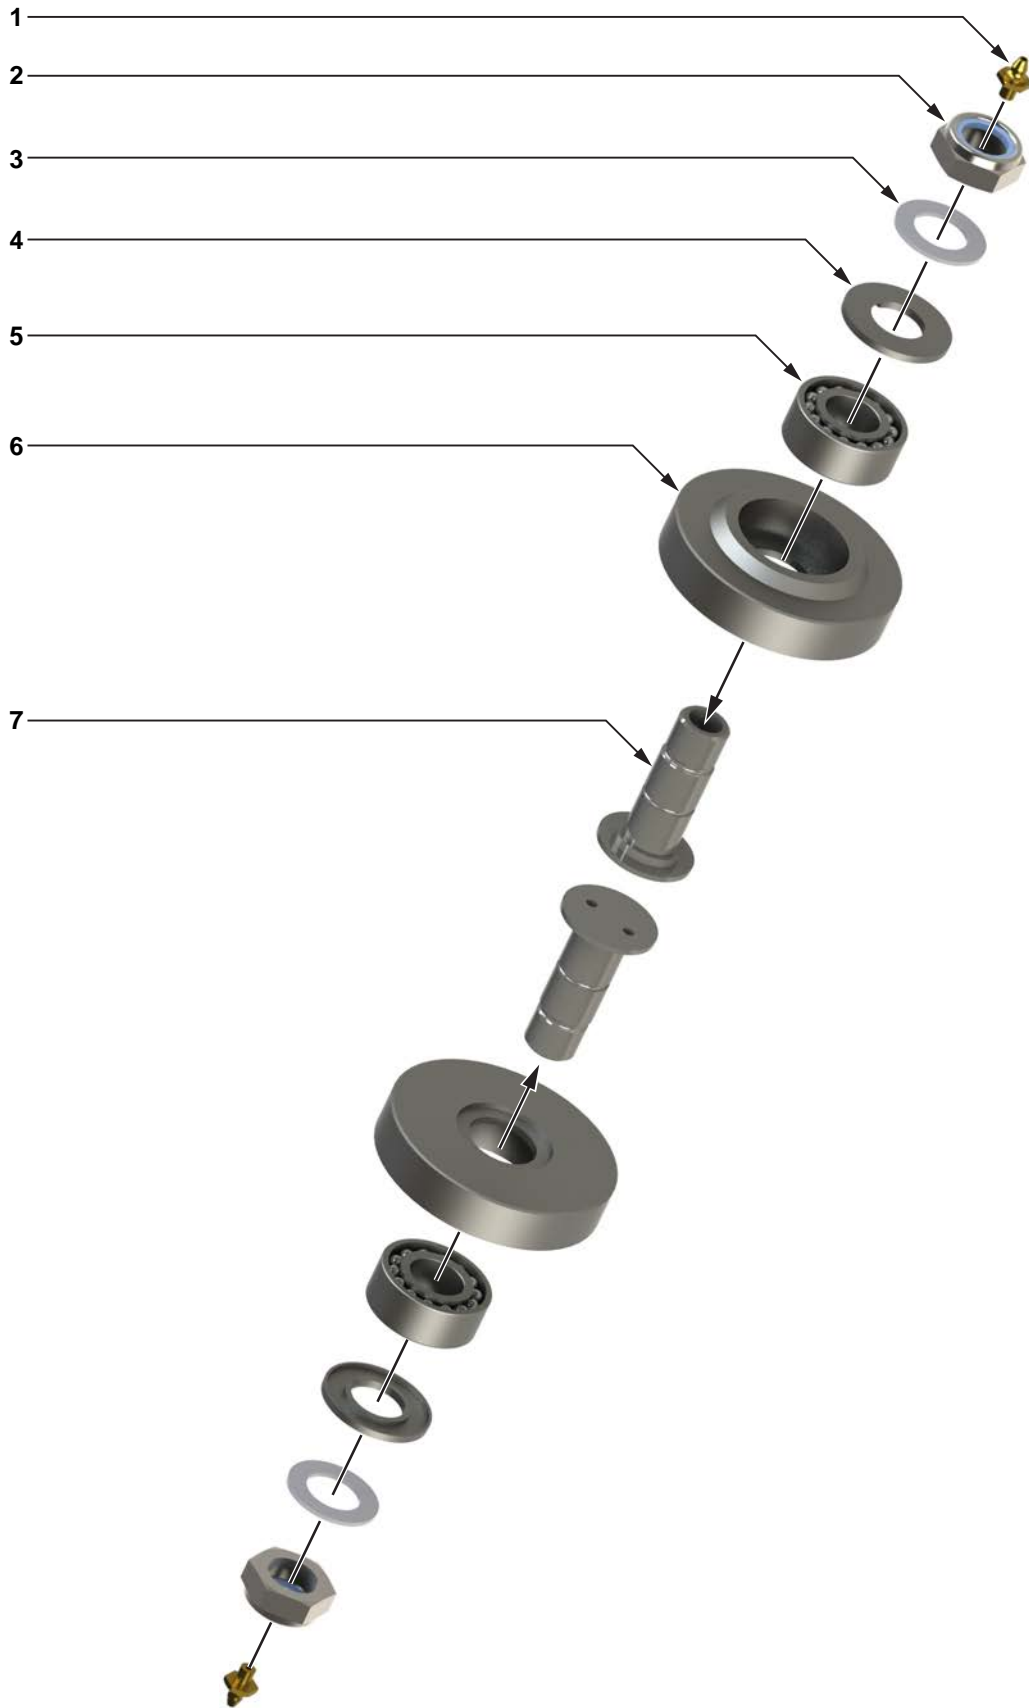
101-3495 HD31-80K Half-Roller Exploded
